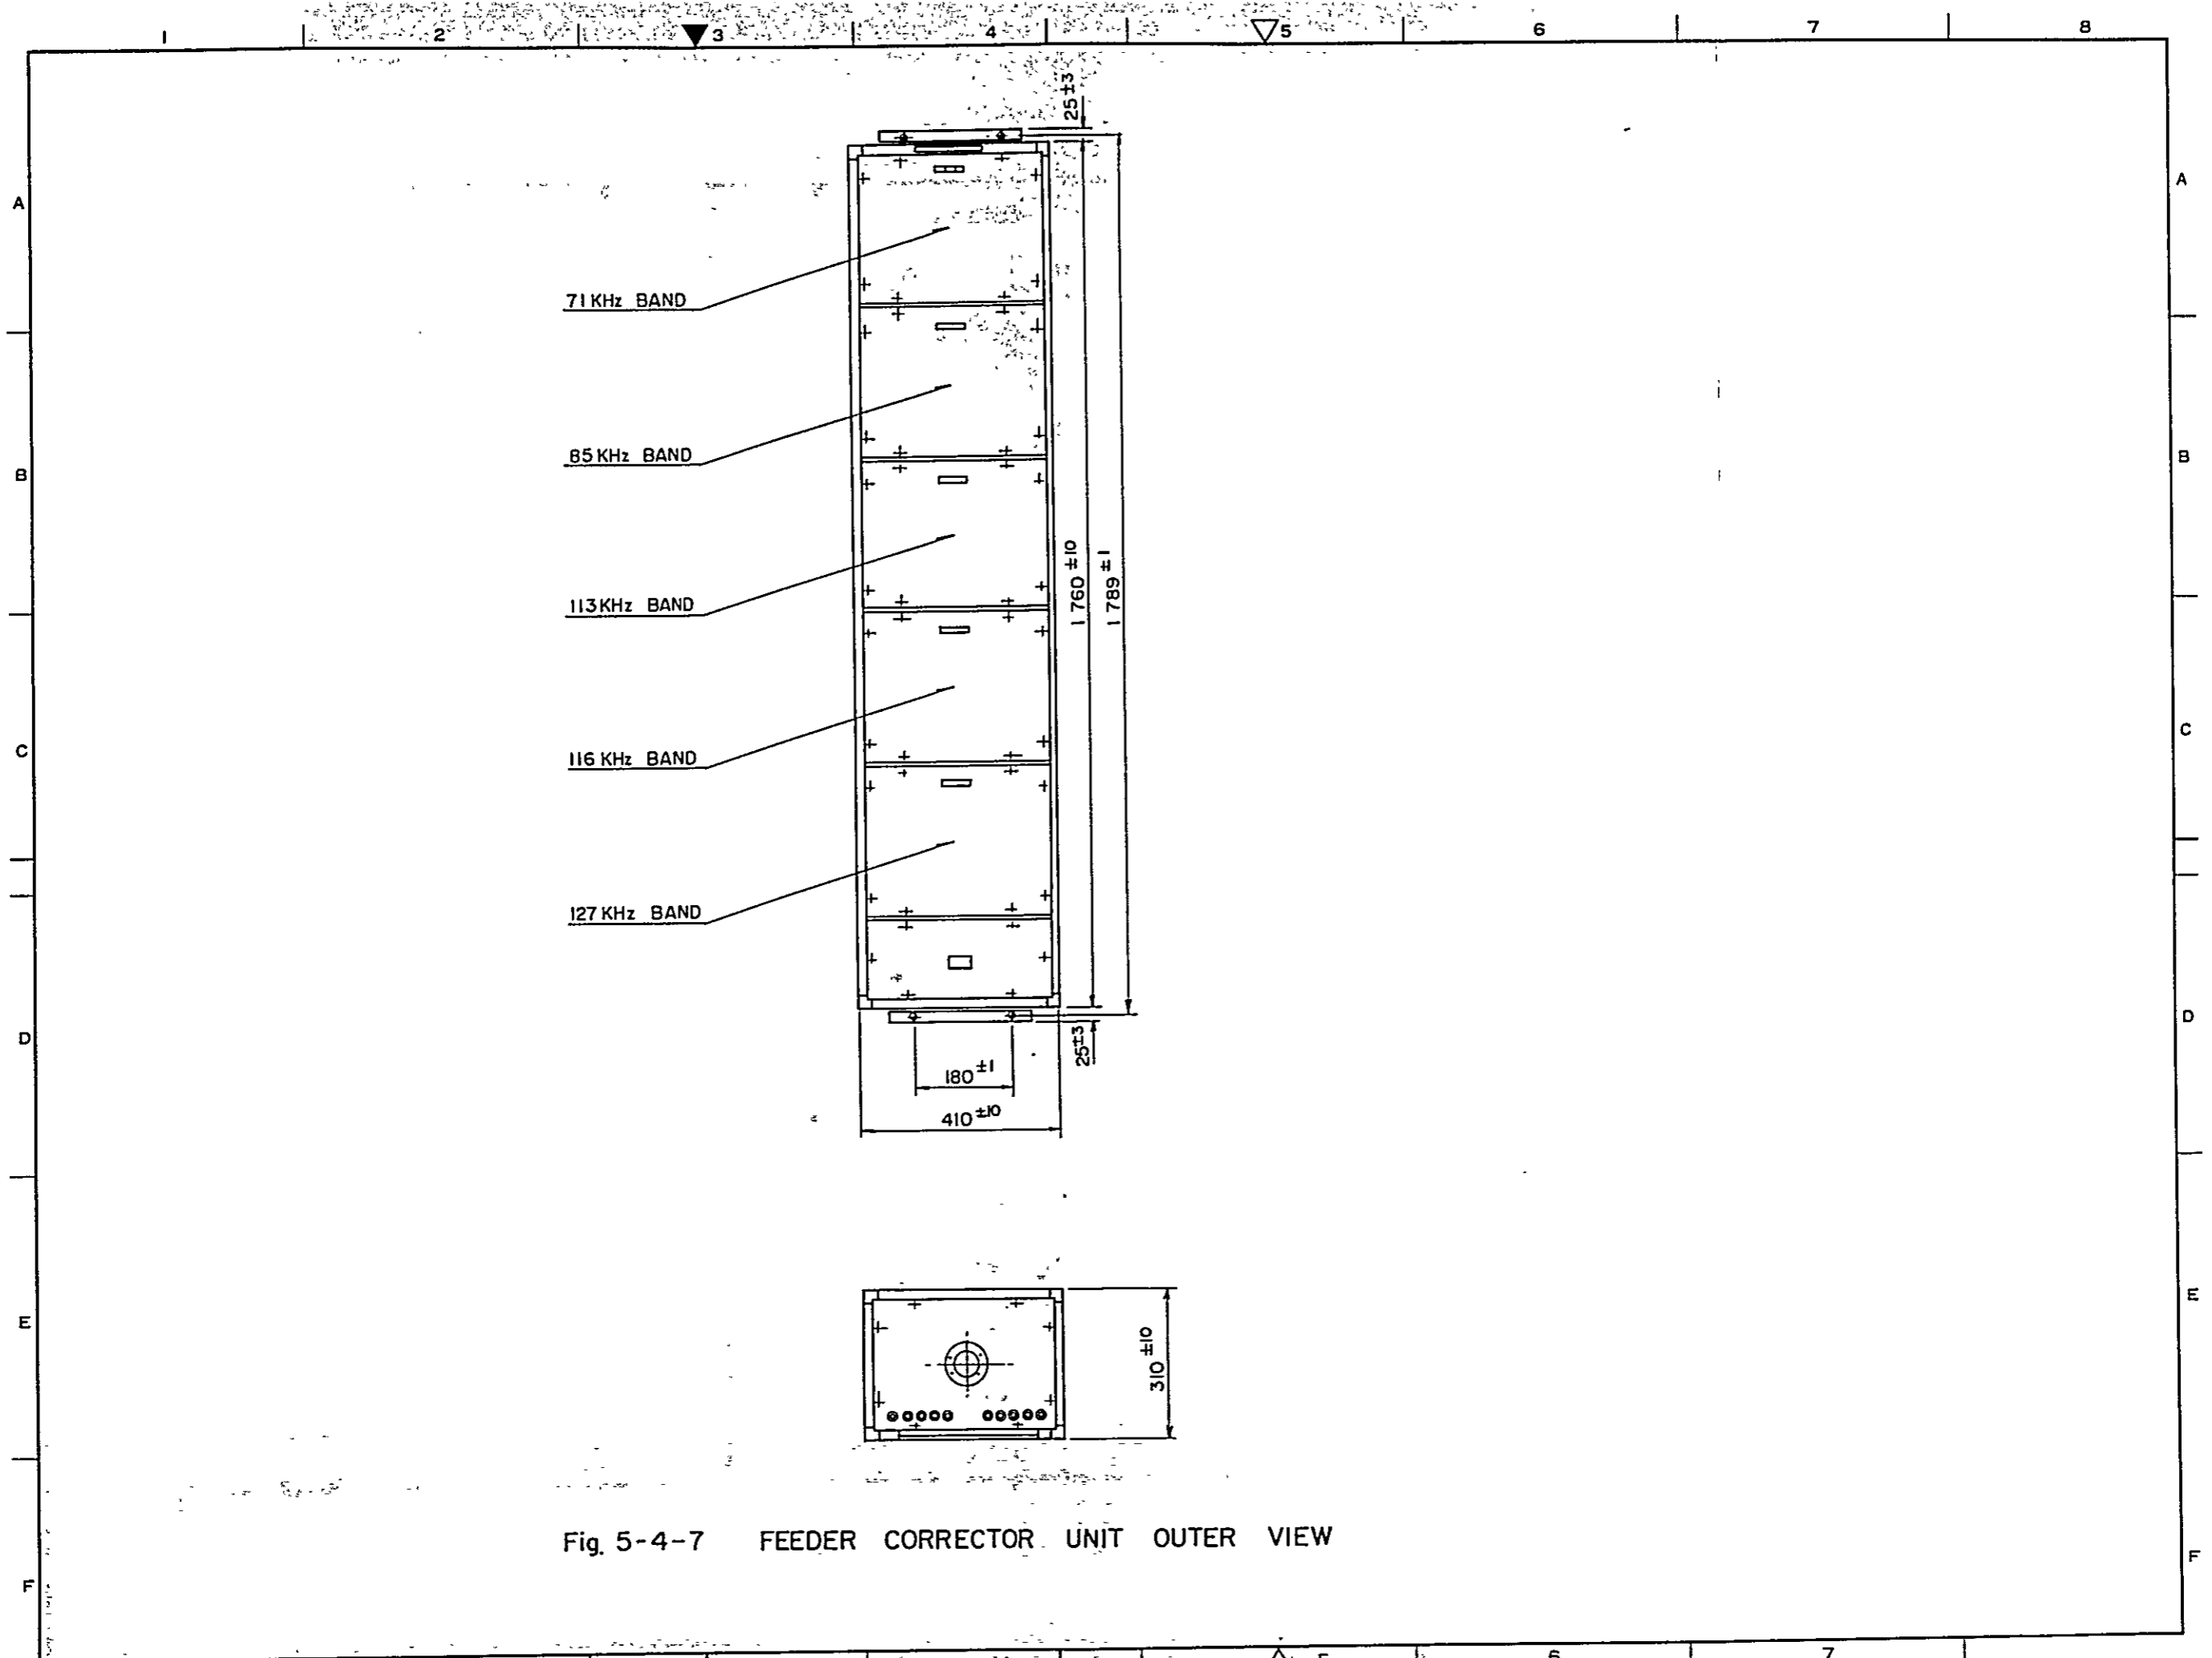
FEEDER CORRECTOR UNIT OUTER VIEW
